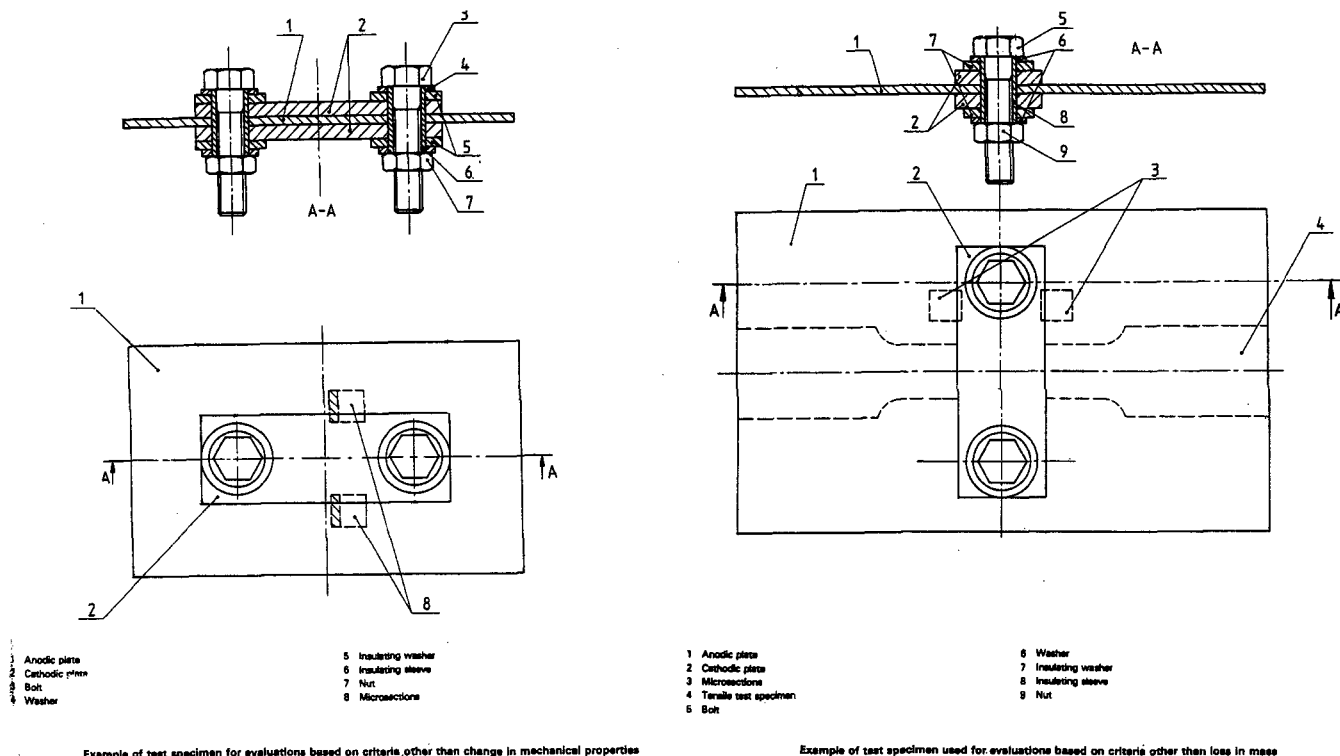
Plate test assembly for galvanic corrosion testing (redrawn and simplified from ISO 7441).
